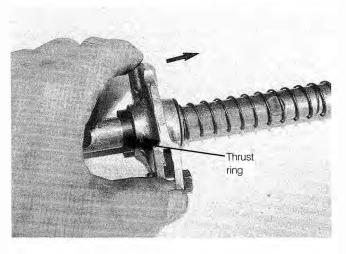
Remove rocker arm retainer (snap ring) by sliding rocker arm and thrust ring in (arrow) and prying off snap ring.
